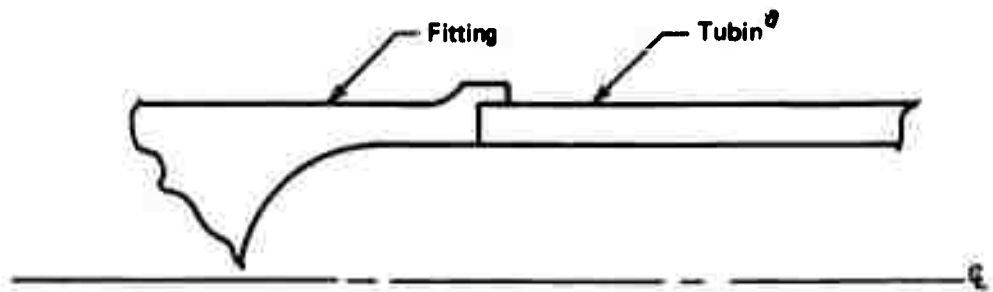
BUTT WELD CONFIGURATION FOR FITTING AND TUBE
